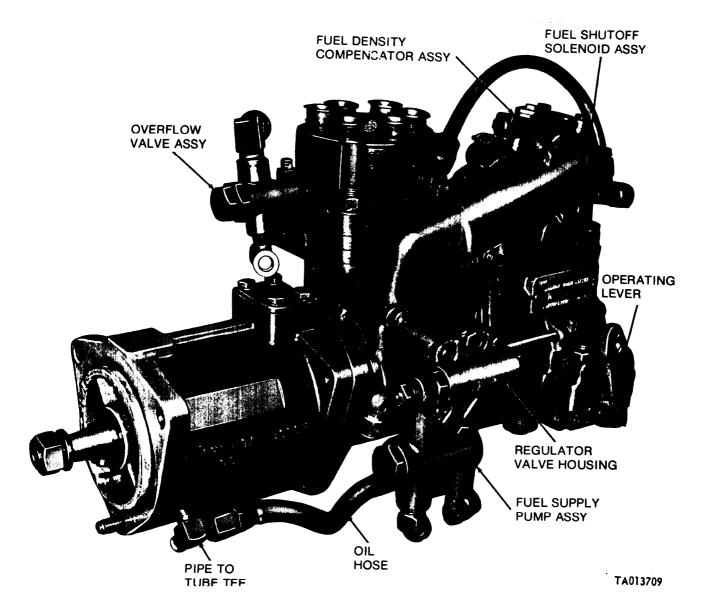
Metering and distributing fuel injection pump assembly (code A), left front view.
